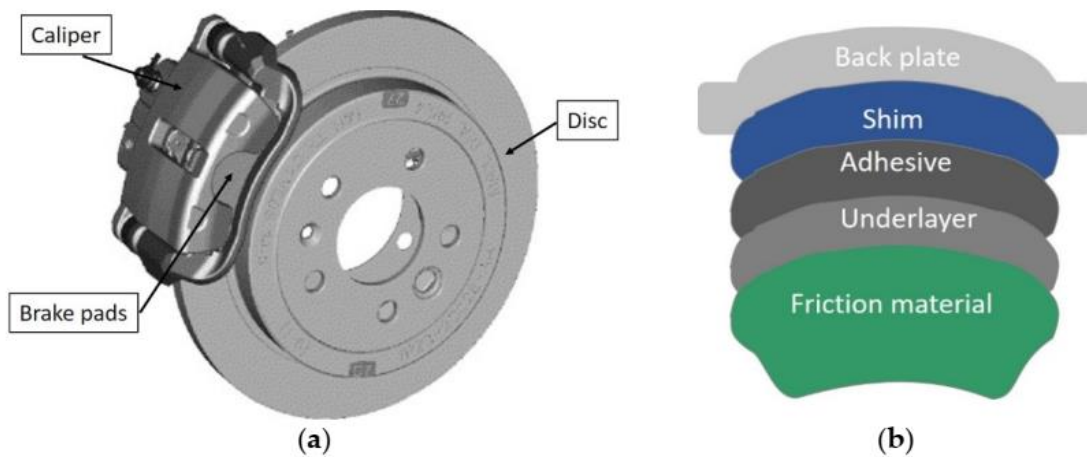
(A) Sliding disc brake (B) Brake pad structure [4]
